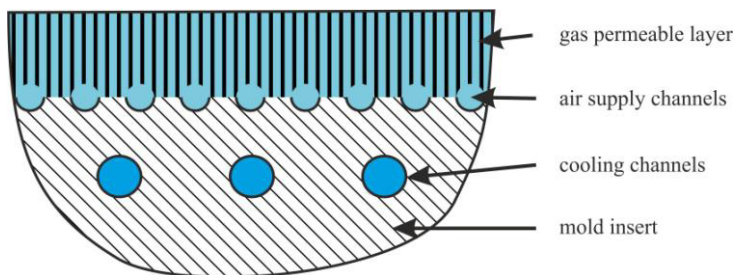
Mold insert with cooling channels and a pneumatic ejector system
